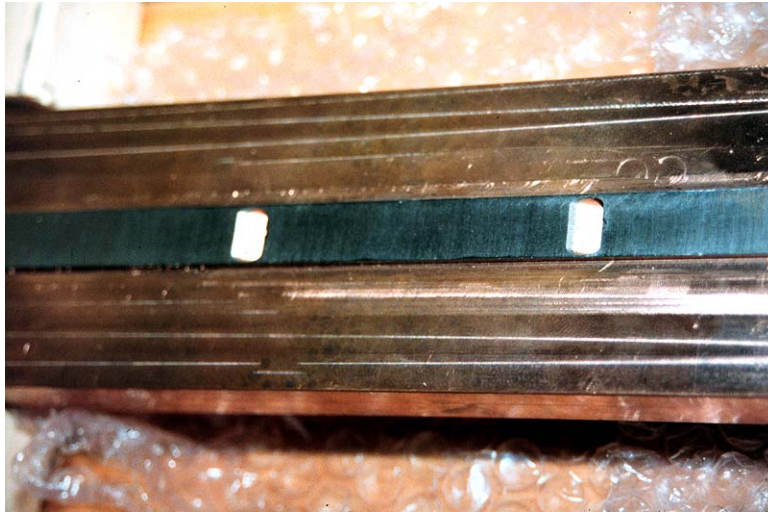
Photograph showing the Inconel brazed to the bore surface of the rail and the bore side of the powder ports
